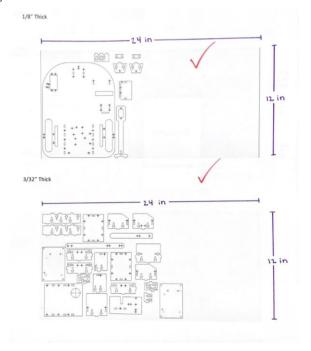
SolidWorks Layout of All Laser Cut pieces for Milestone 5
